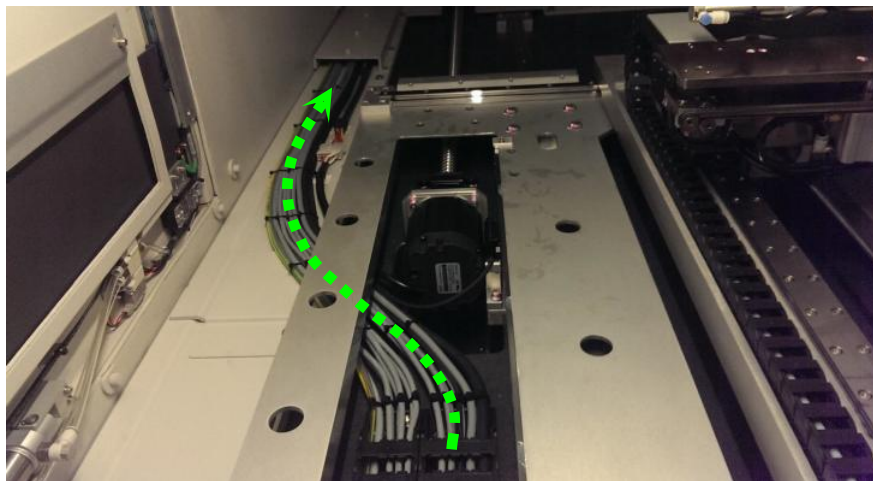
Stepper Motor Cable Routing (Y Axis Wide E-Chain)
